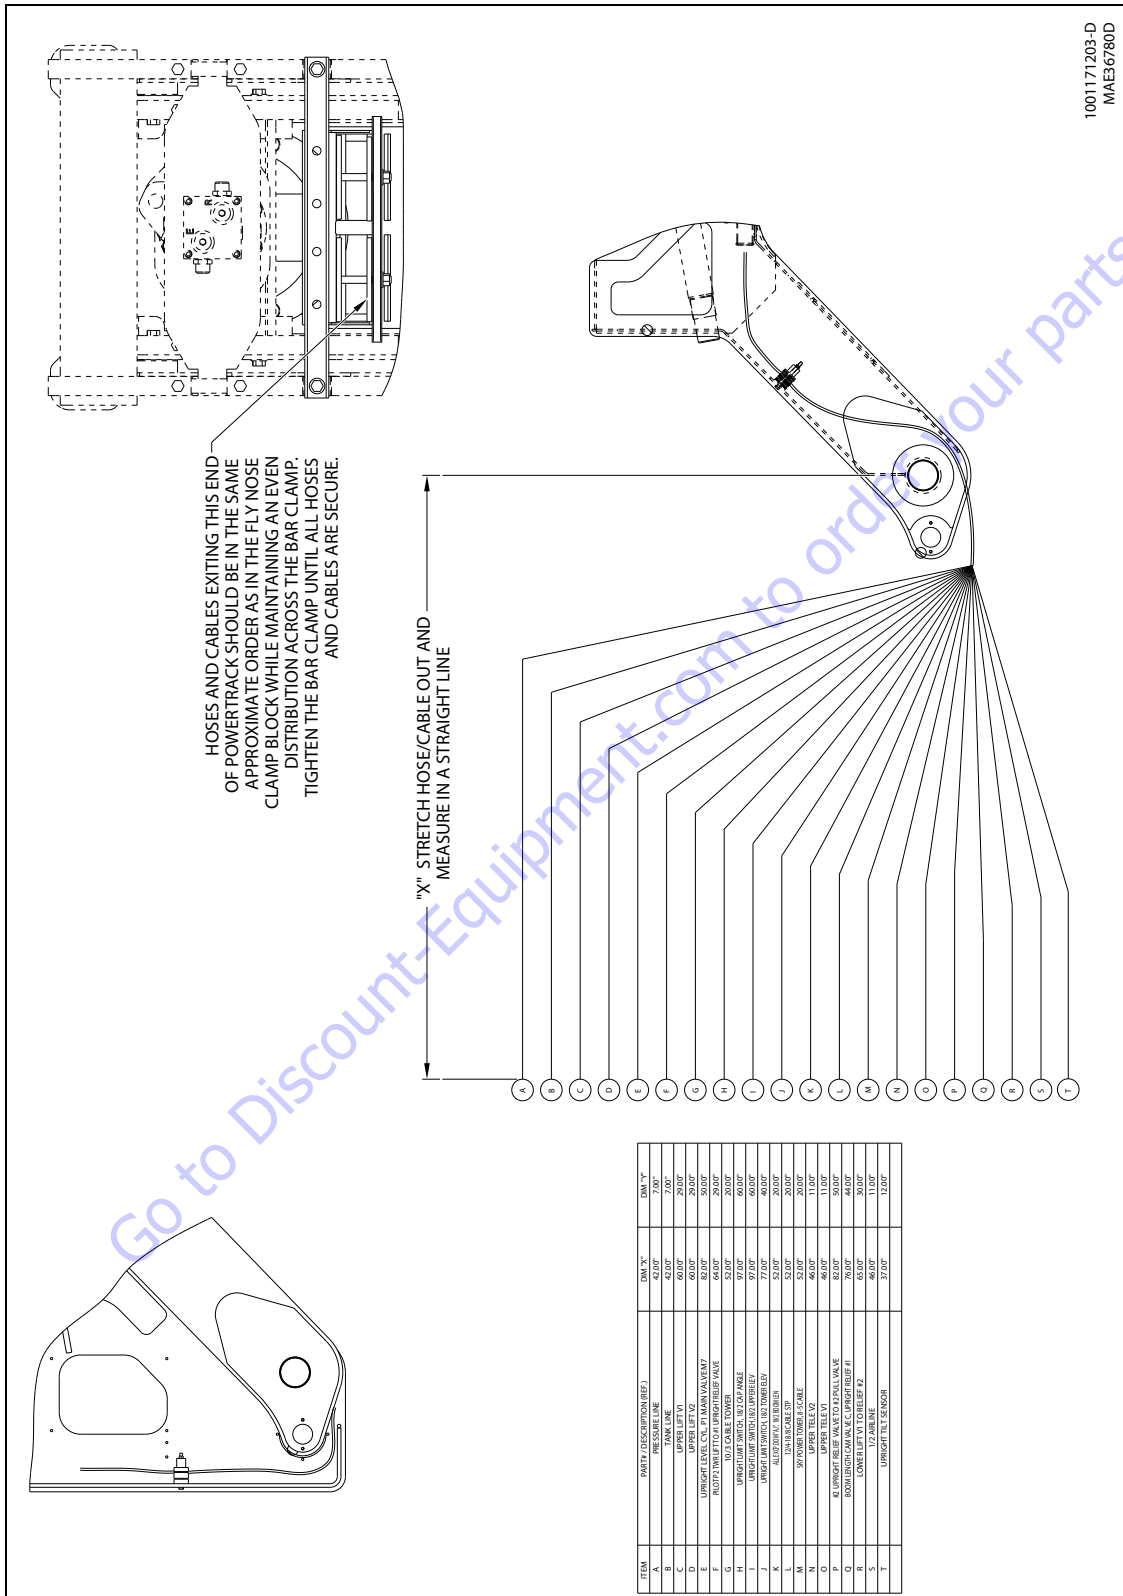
Powertrack Installation Tower Boom (Sheet 2 of 3)
